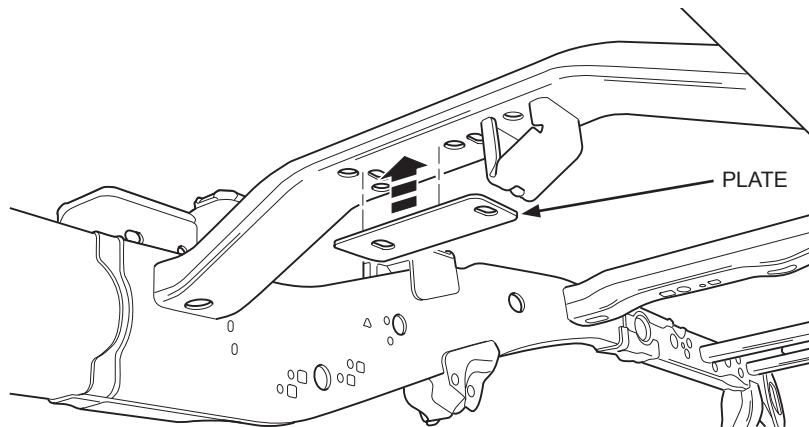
INSTALL REINFORCEMENT PLATE IF REQUIRED
